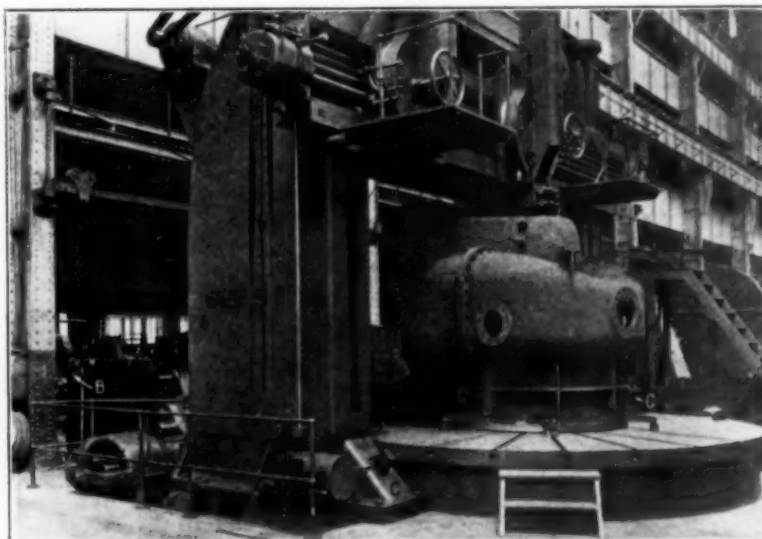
BORING MILL WITH  $7\frac{1}{2}$  AND 50 H.P. MOTORS
